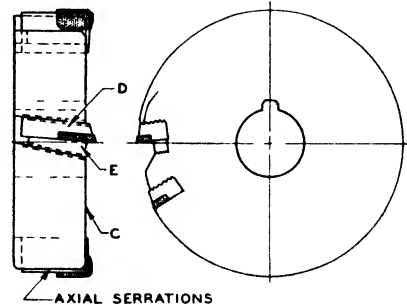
The Goddard & Goddard Type of Face Mill with Inserted Carbide Tipped Blades
